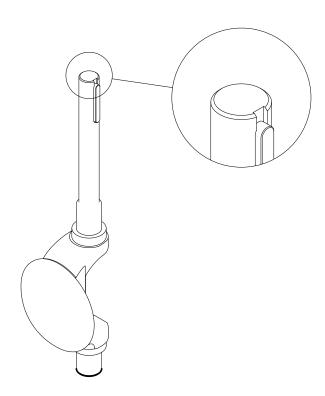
The groove at the end of the shaft marks the position of the ball segment in the valve.
